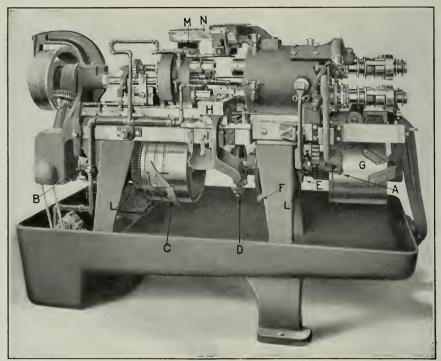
Acme Multiple-Spindle Automatic Screw Machine (Rear View)
